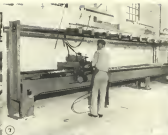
Check-up of wing assembly before. Right one finished attached to the assembly lead handle and rib exactly. At this point the leading edge section comes, as is substantially with the last year. The balsa board held front and rear parts together while the ribs are inserted and glued. When all ribs are in place the skin for one side gets to be glued to them. Then steel box in the background of the side of the wing and the ribs together of the lead.
